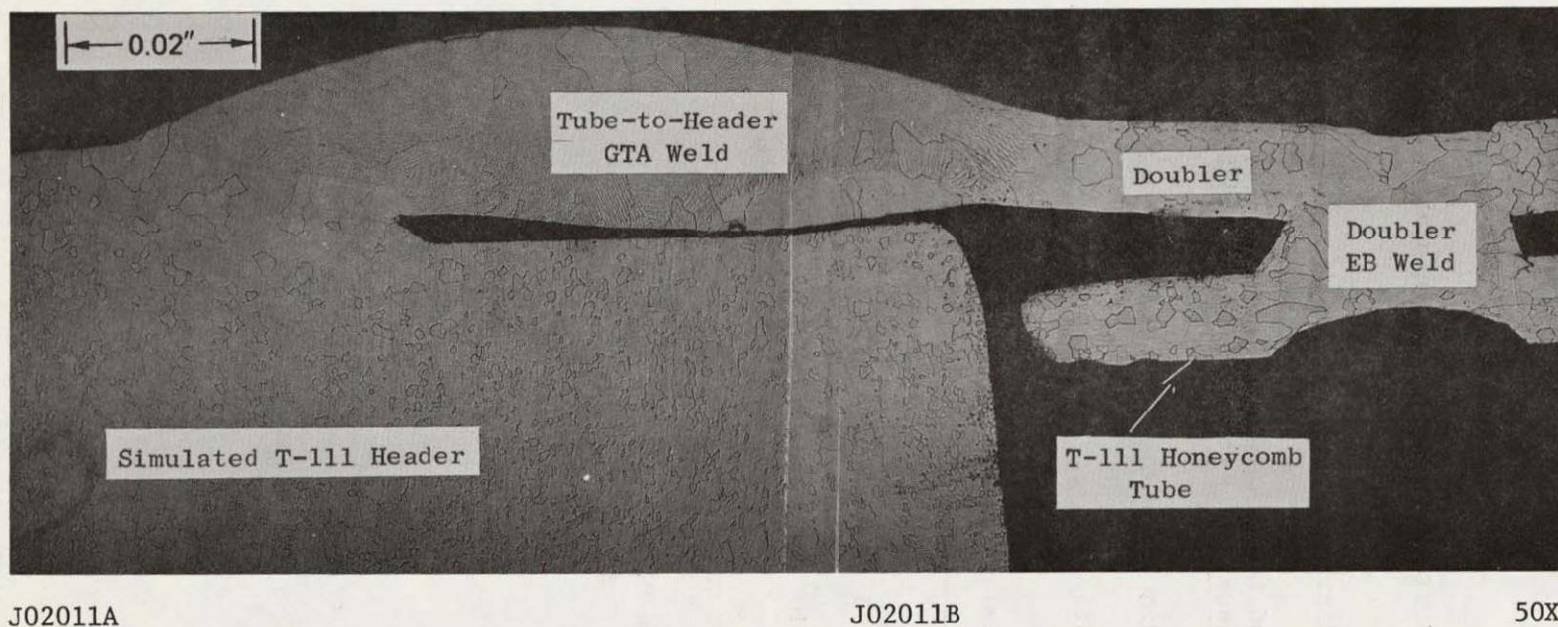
Microstructure of Tube-to-Header GTA Weld Specimen No. 17.
